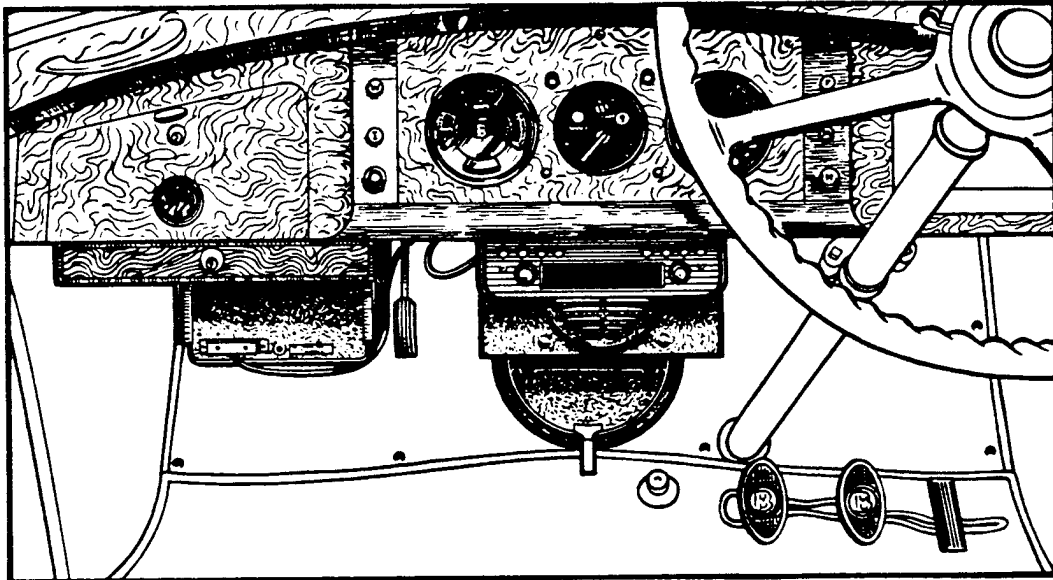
FINISHED VIEW OF HEATER IN POSITION.
